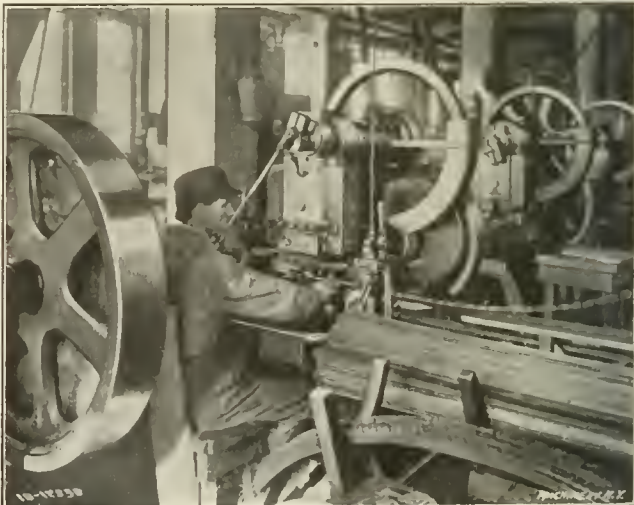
Blanking Side Pieces from Cold Drawn Stock
